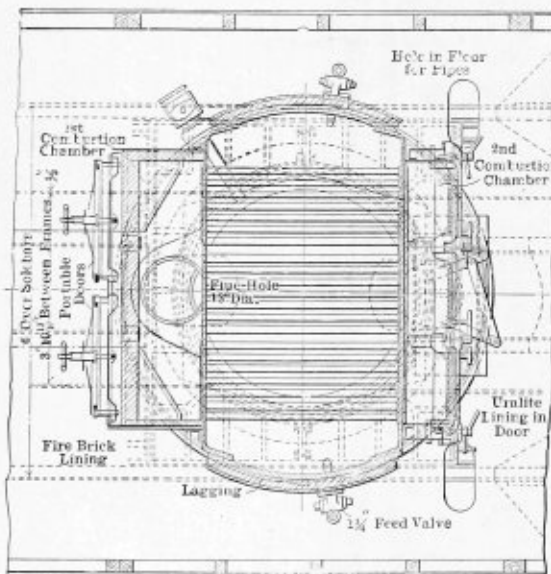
PLAN VIEW OF COCHRAN BOILER.
